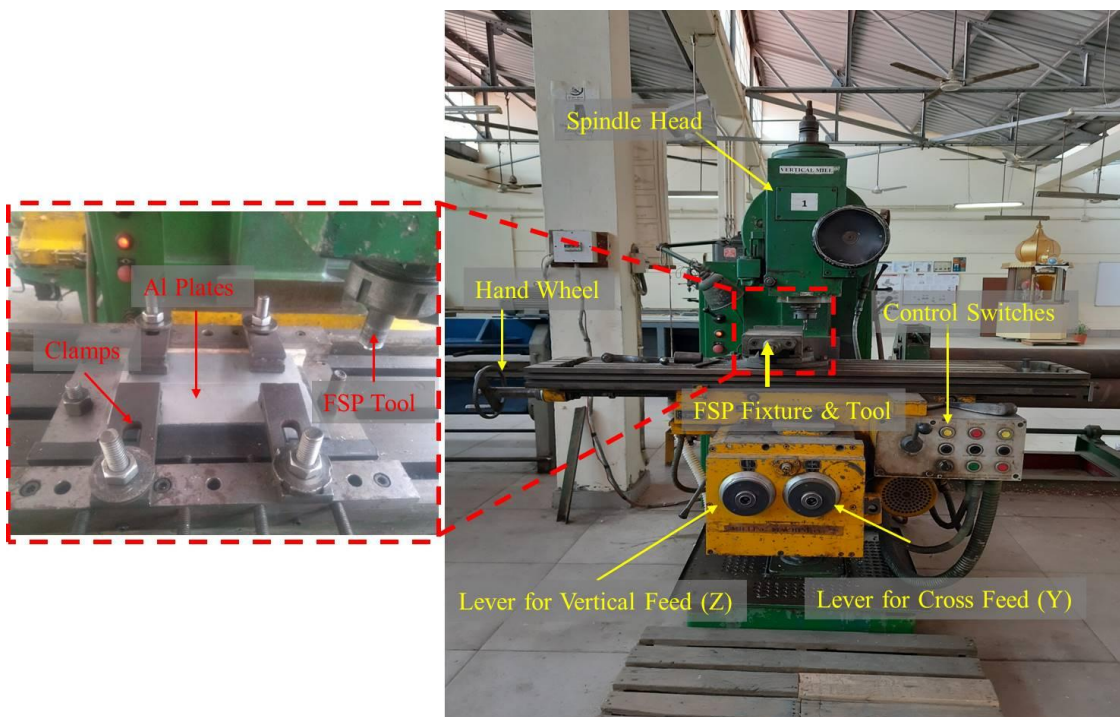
HMT vertical milling machine setup for FSP; Zoomed view of fixture
